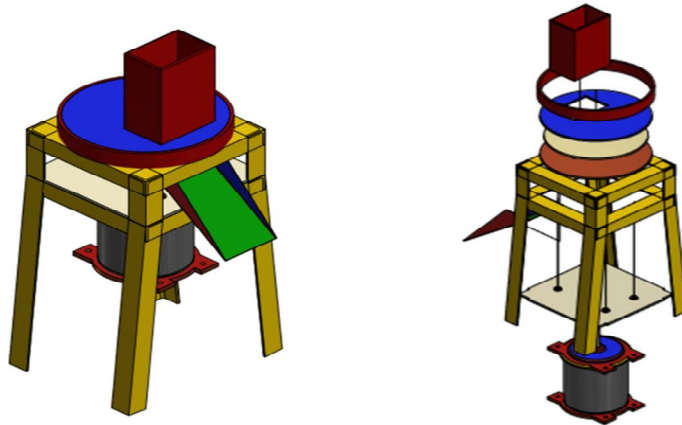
Mini Ginger Chopping Machine Design and Exploded View
